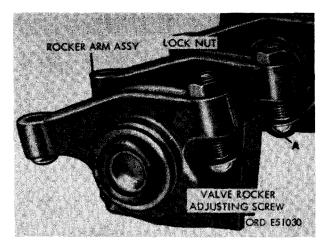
REMOVING OR INSTALLING VALVE ROCKER ARM ADJUSTING SCREW.
